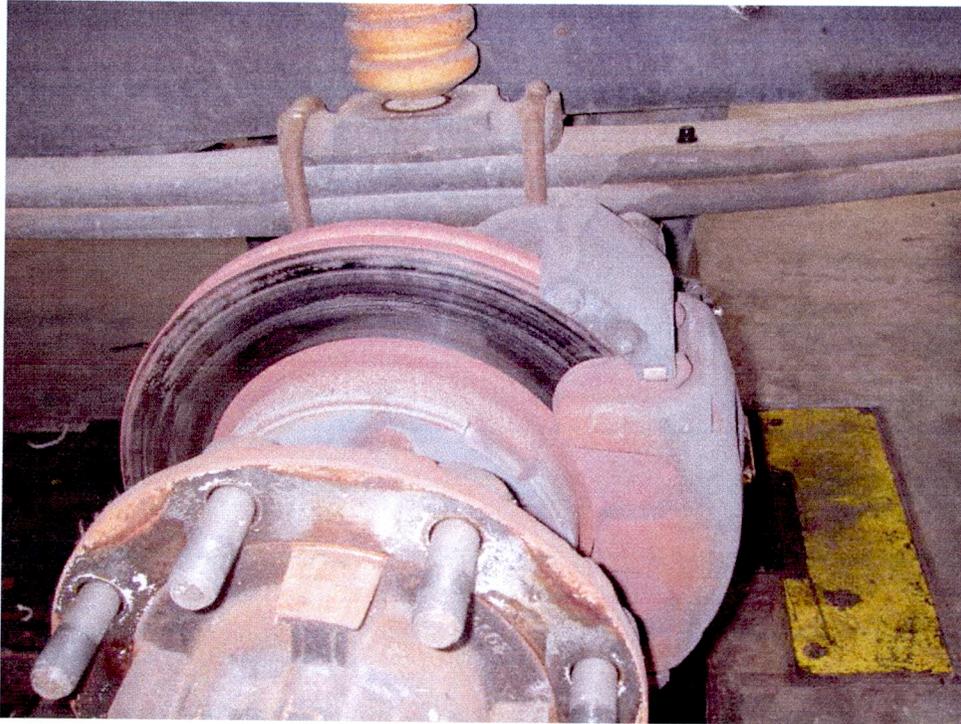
Overall View of the Left Rear Brake Showing the Marks on the Rotor and the Paint Missing From a Significant Portion of the Caliper
